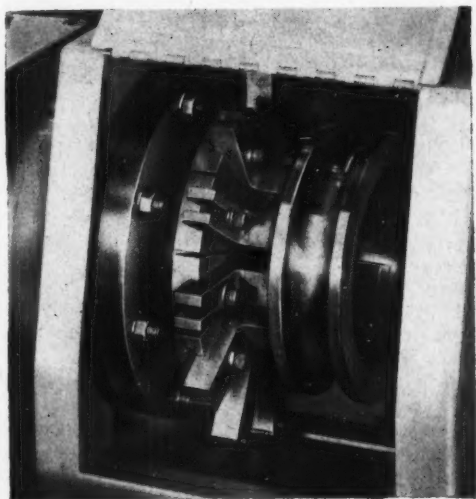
Typical air-operated chucking arrangement for use when plunge-grinding the track in an inner ring for a ball bearing
